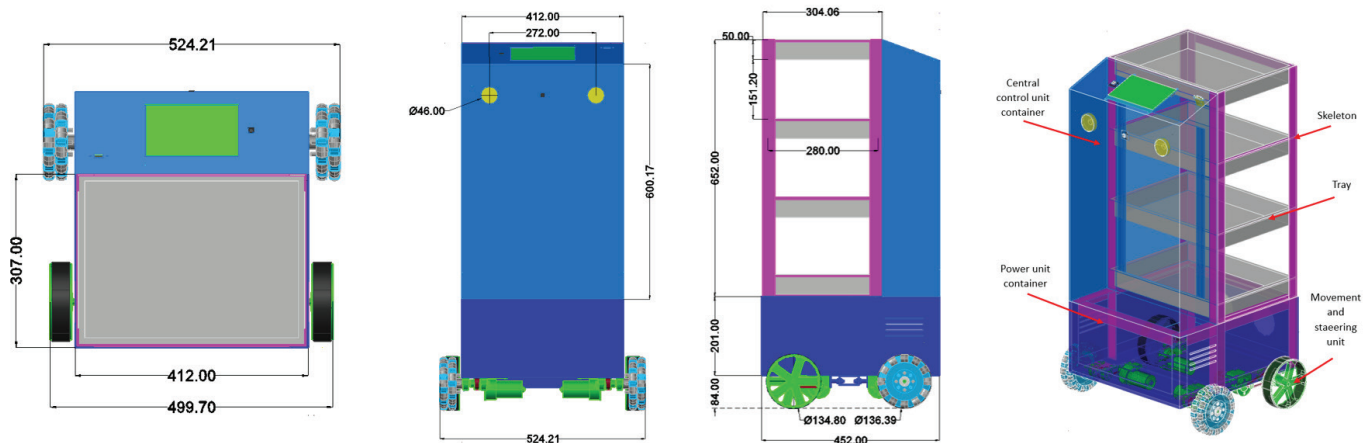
The robot’s frame and dimensions. The measurement unit is millimetre.
